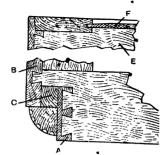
Part Plan of Left-hand Front Corner and Carcase Back of Chest of Drawers.
